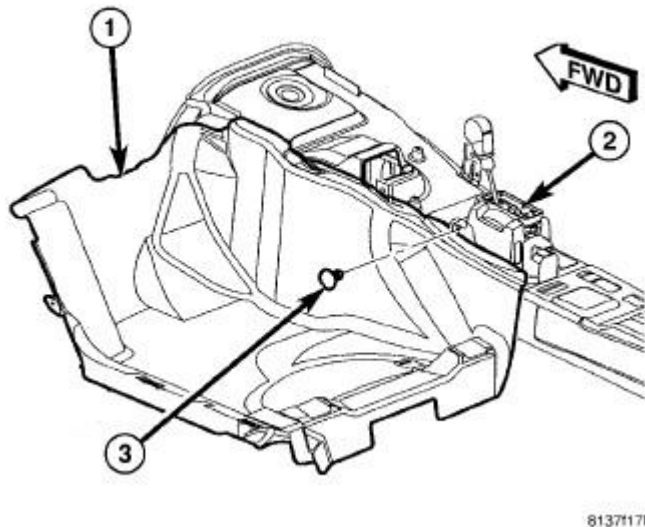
Front Carpet Push-Pin Fastener (Driverside Only)
